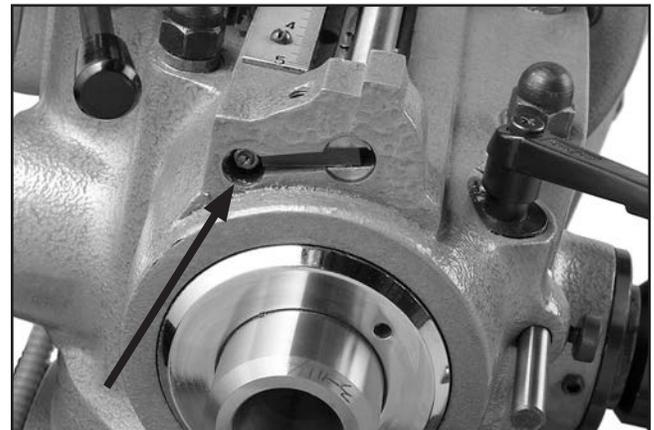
Downfeed clutch lever adjusting screw and locknut.
